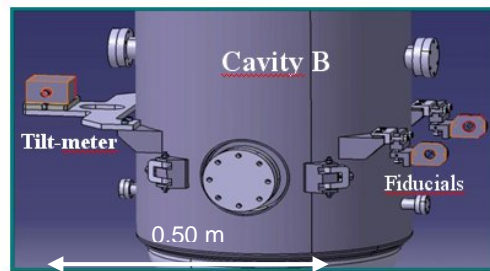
Target arm fixtures for transferring beam axis of the cavity B
